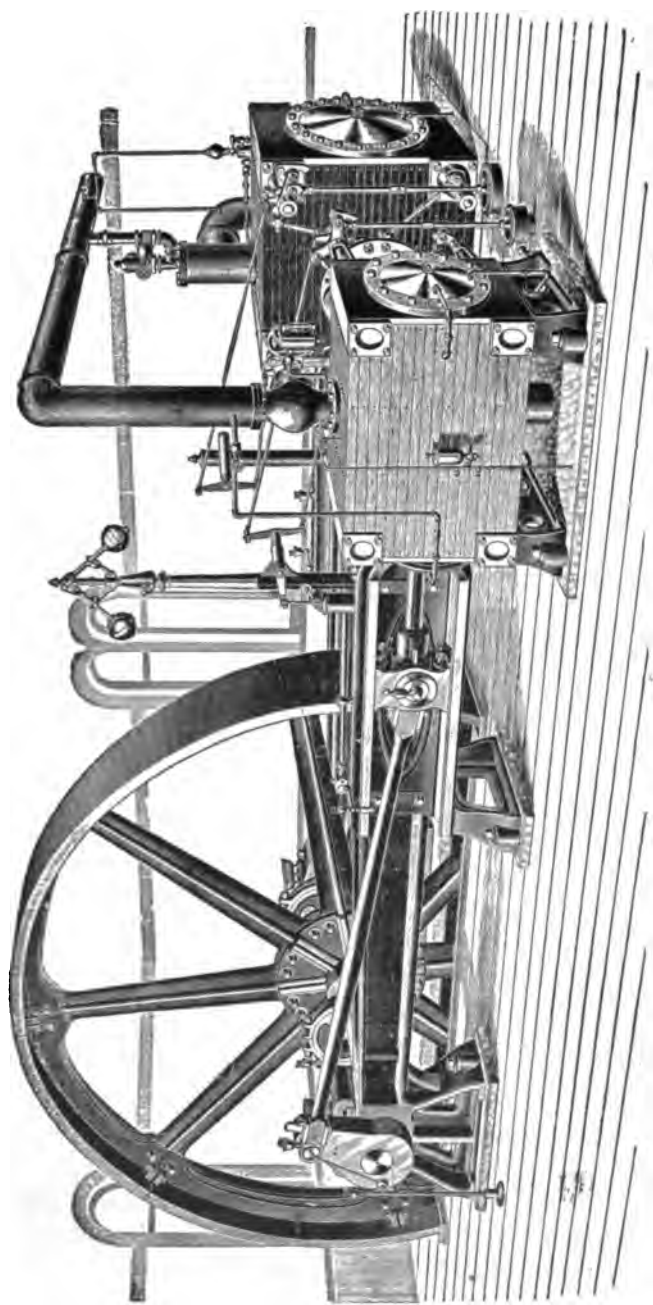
“CROSS-COMPOUND” ENGINE.
